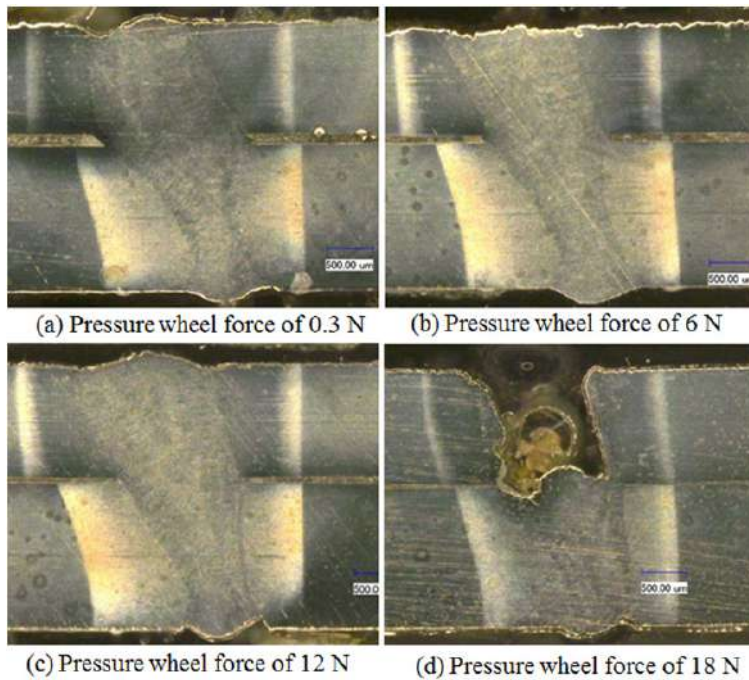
Cross-sectional views of the welds acquired by various pressure wheel forces under a laser power of 4.0 kW and a welding speed of 50 mm/s
